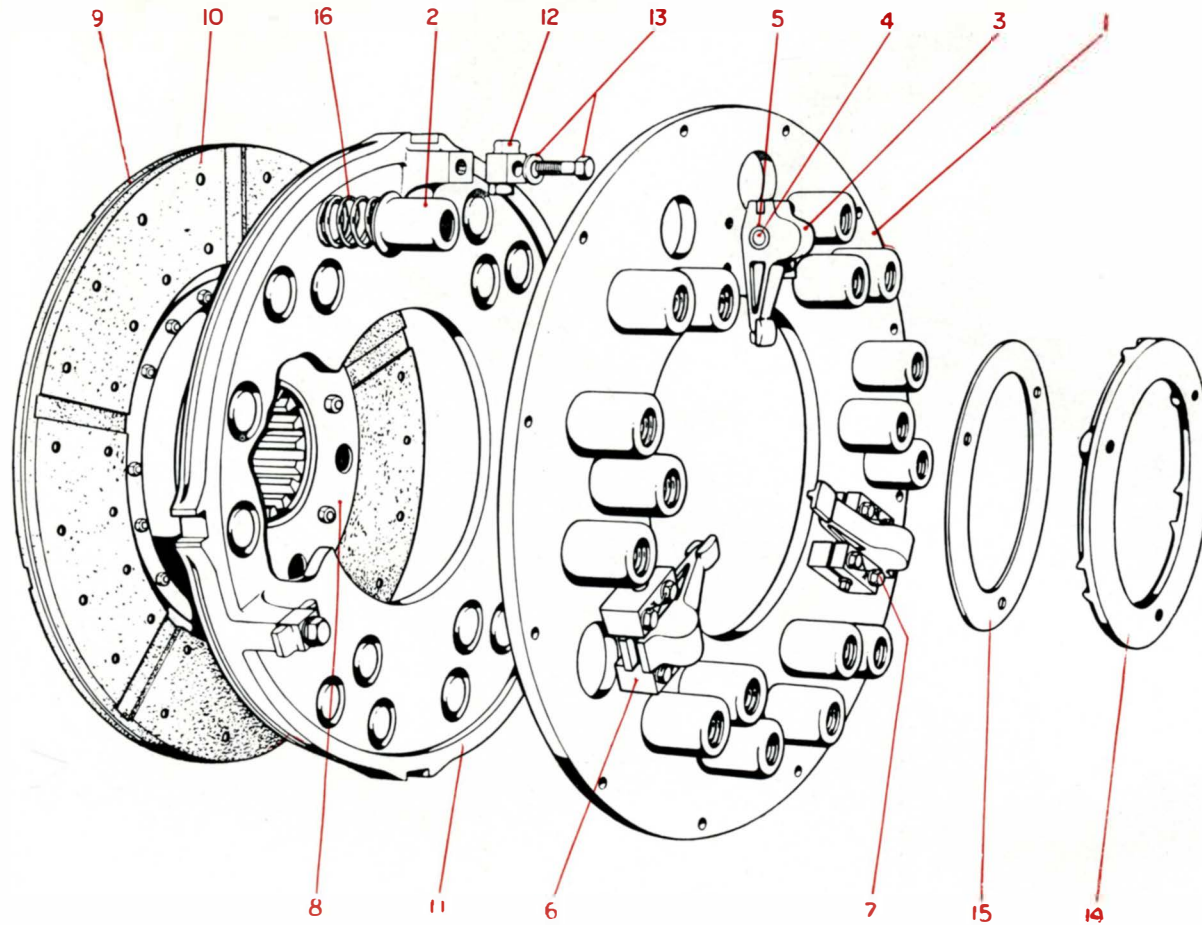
EXPLODED VIEW OF THE CLUTCH
